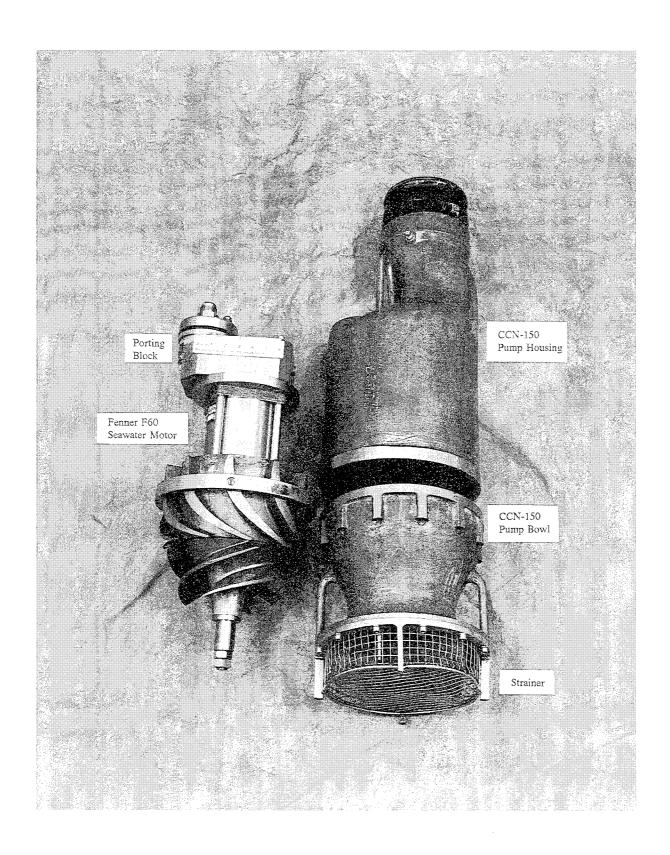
CCN-150 transfer pump and Fenner F60 seawater motor - exploded view.
